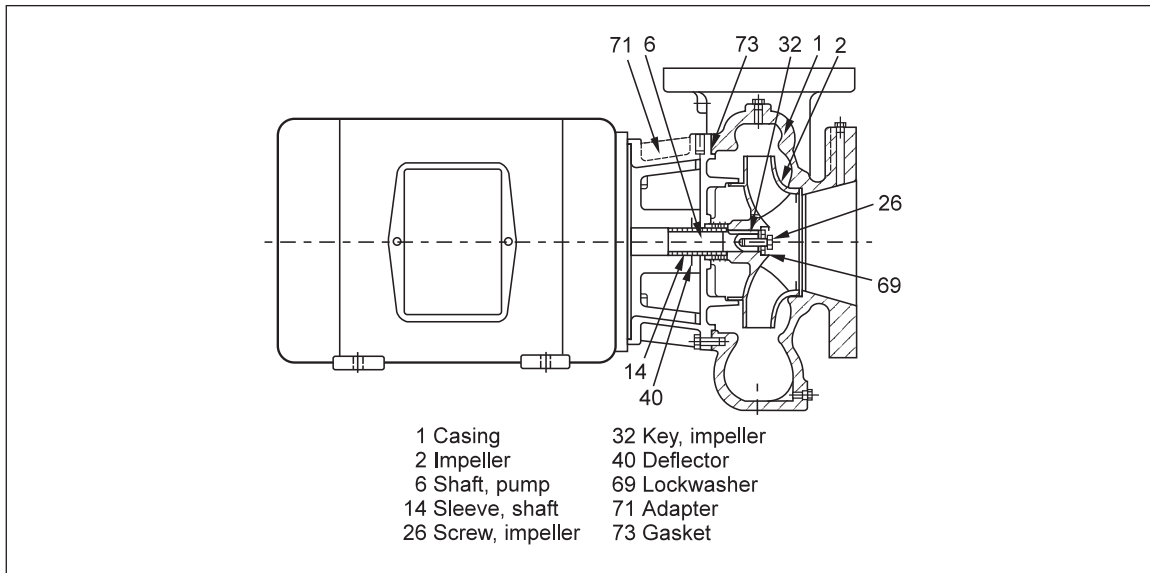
Cutaway drawing of a typical end suction pump with a close coupled electric motor
